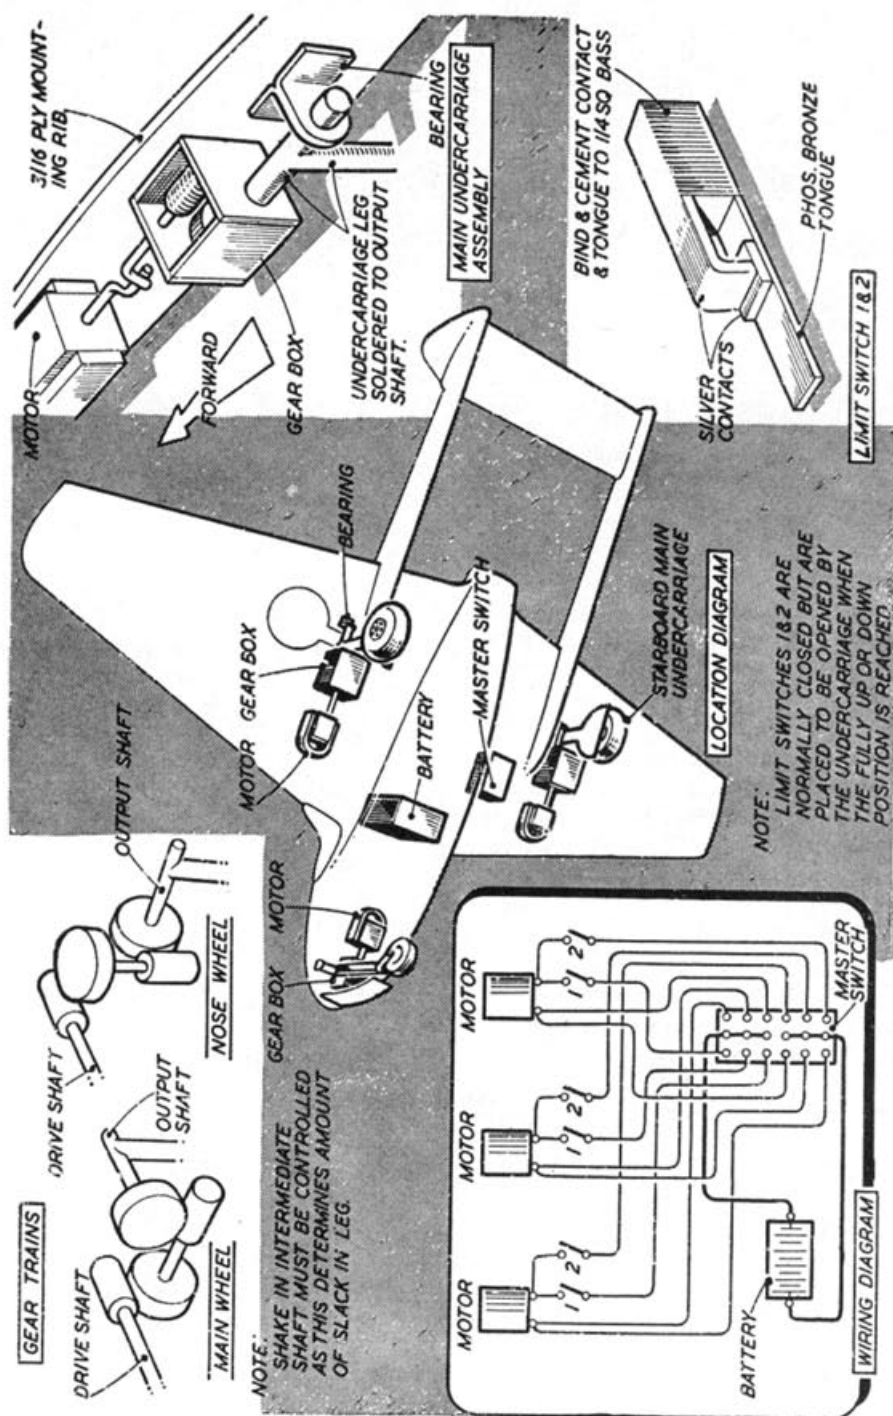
Electrical undercarriage retraction gear used on American Dynajet powered scale D:H. Vampire uses miniature motors driving a gear train with limit switches to hold "up" or "down". Master switch is operated by a third line from the control handle and has a spring bias which calls for constant line tension. Should the line break, or slacken, the undercarriage comes down for landing. Total reduction from motor to each leg via double-worm gearboxes is 1369:1. Gearboxes are from model railway locomotives.
